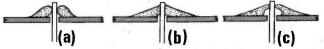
(a) A dry-joint often has a rounded shape due to the surface tension of molten solder. (b) A good joint slopes gradually from the wire and print. (c) A joint may appear good but, having taken at only the end of the wire, is dry inside and may later break to give intermittent contact.
